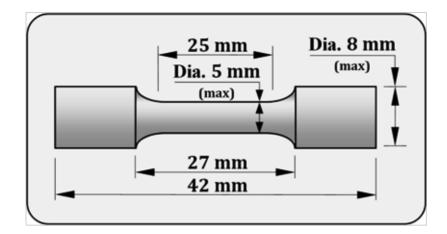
Typical dimensions of the specimens for the tensile test.
